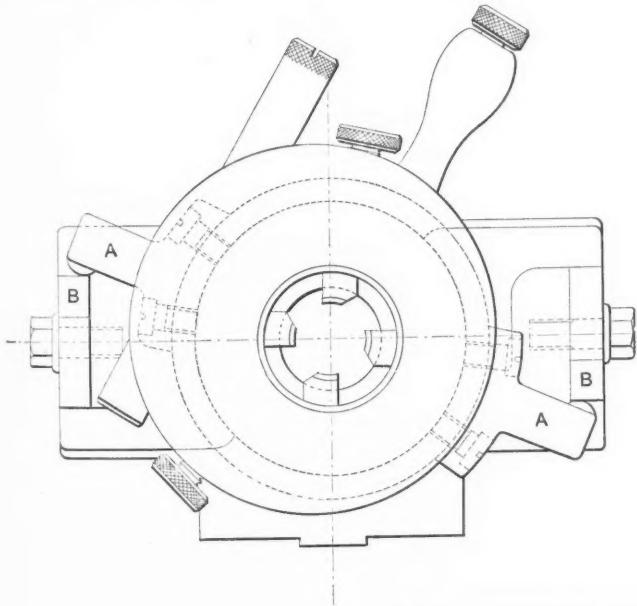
Automatic Die Arranged for Cutting Taper Threads.
